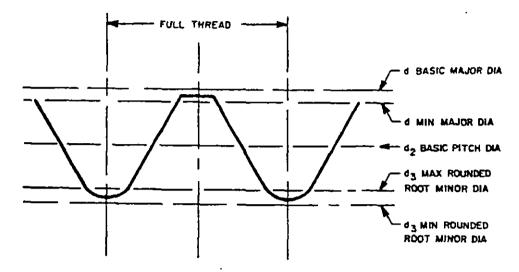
COMPLETELY FORMED EXTERNAL THREAD
